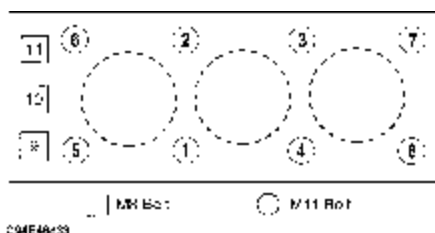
Cylinder Head Bolt Tightening Sequence
